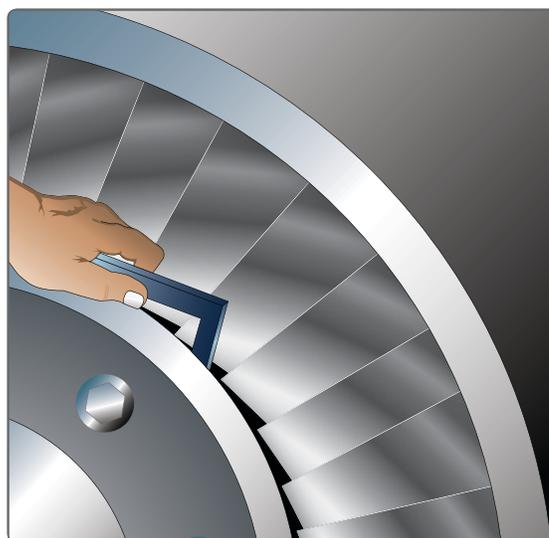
Measuring turbine wheel to exhaust cone clearance.
